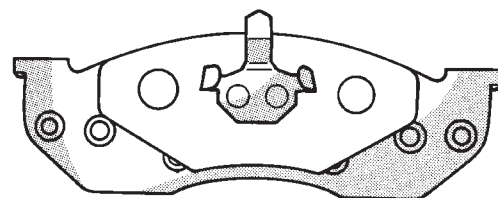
Removing or Installing Inboard Shoe Assembly
